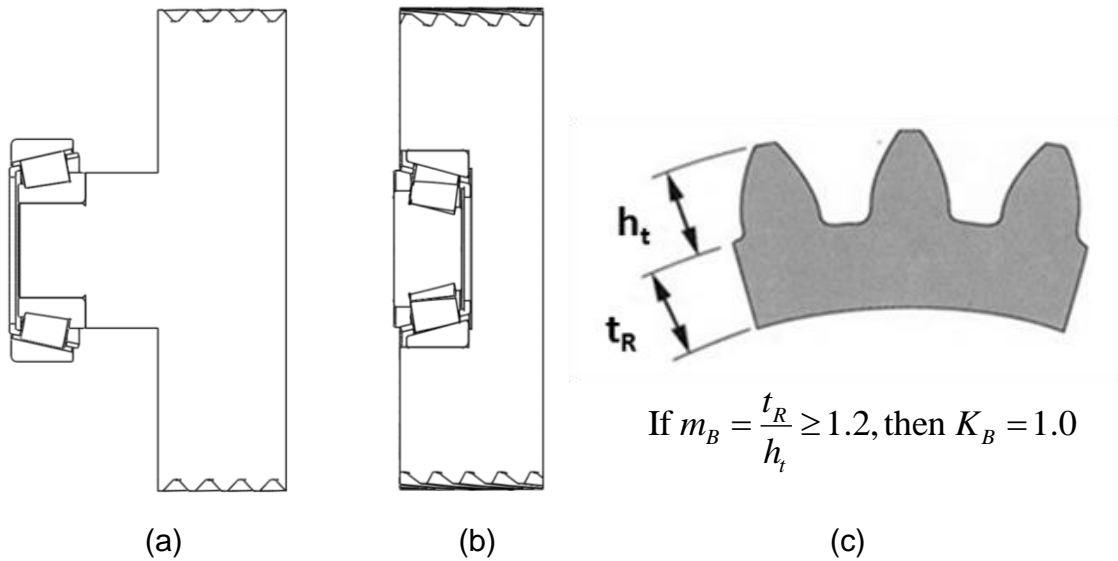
(a) External Gear with integral mounting shaft for press-fit bearings (b) External gear with internally supported bearing (c) Backup Ratio
